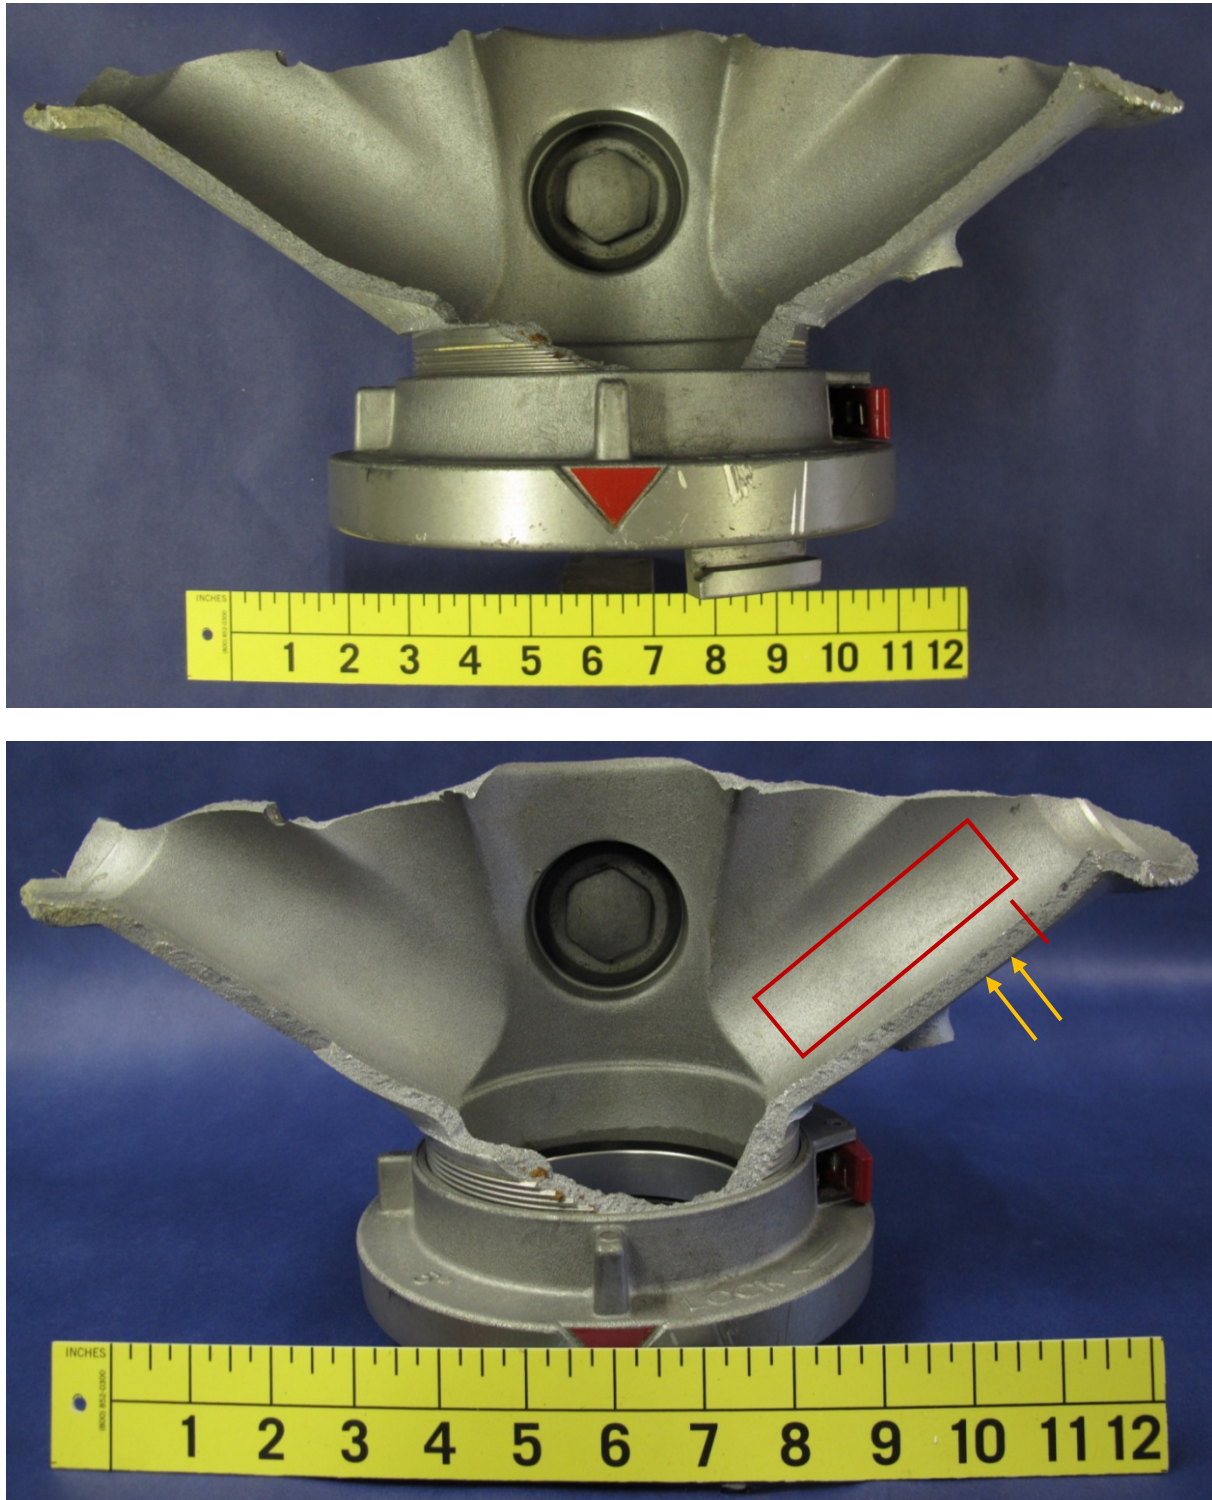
Several views of the smaller piece. The fracture surface is flush with the threads where the manifold is threaded into the inlet connection. Red box shows approximate location of samples removed for tensile testing. Red line shows approximate location of cross-sectional metallurgical mount. Yellow arrows show approximate location of SEM imaging of fracture surface.
